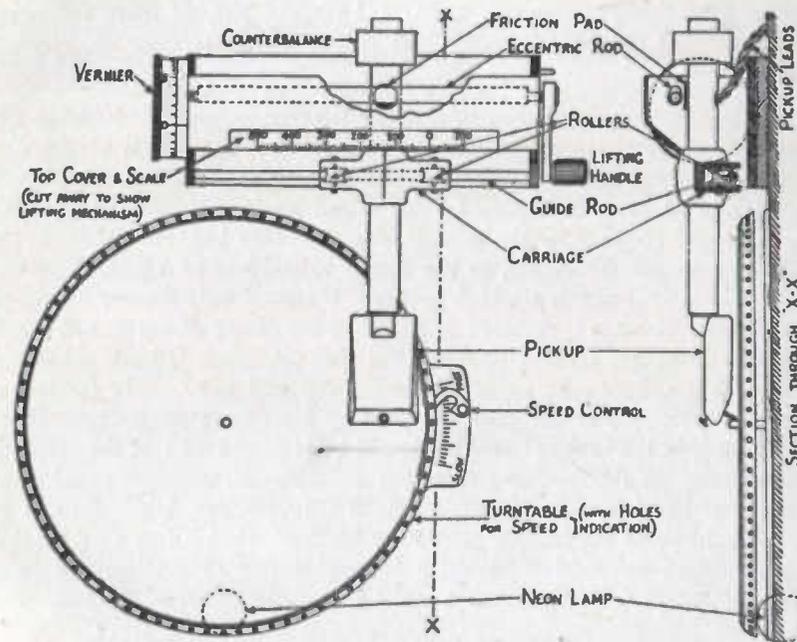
PLAN AND END VIEW OF GRAMOPHONE TURN-TABLE AND PICK-UP, WITH GROOVE LOCATING UNIT
